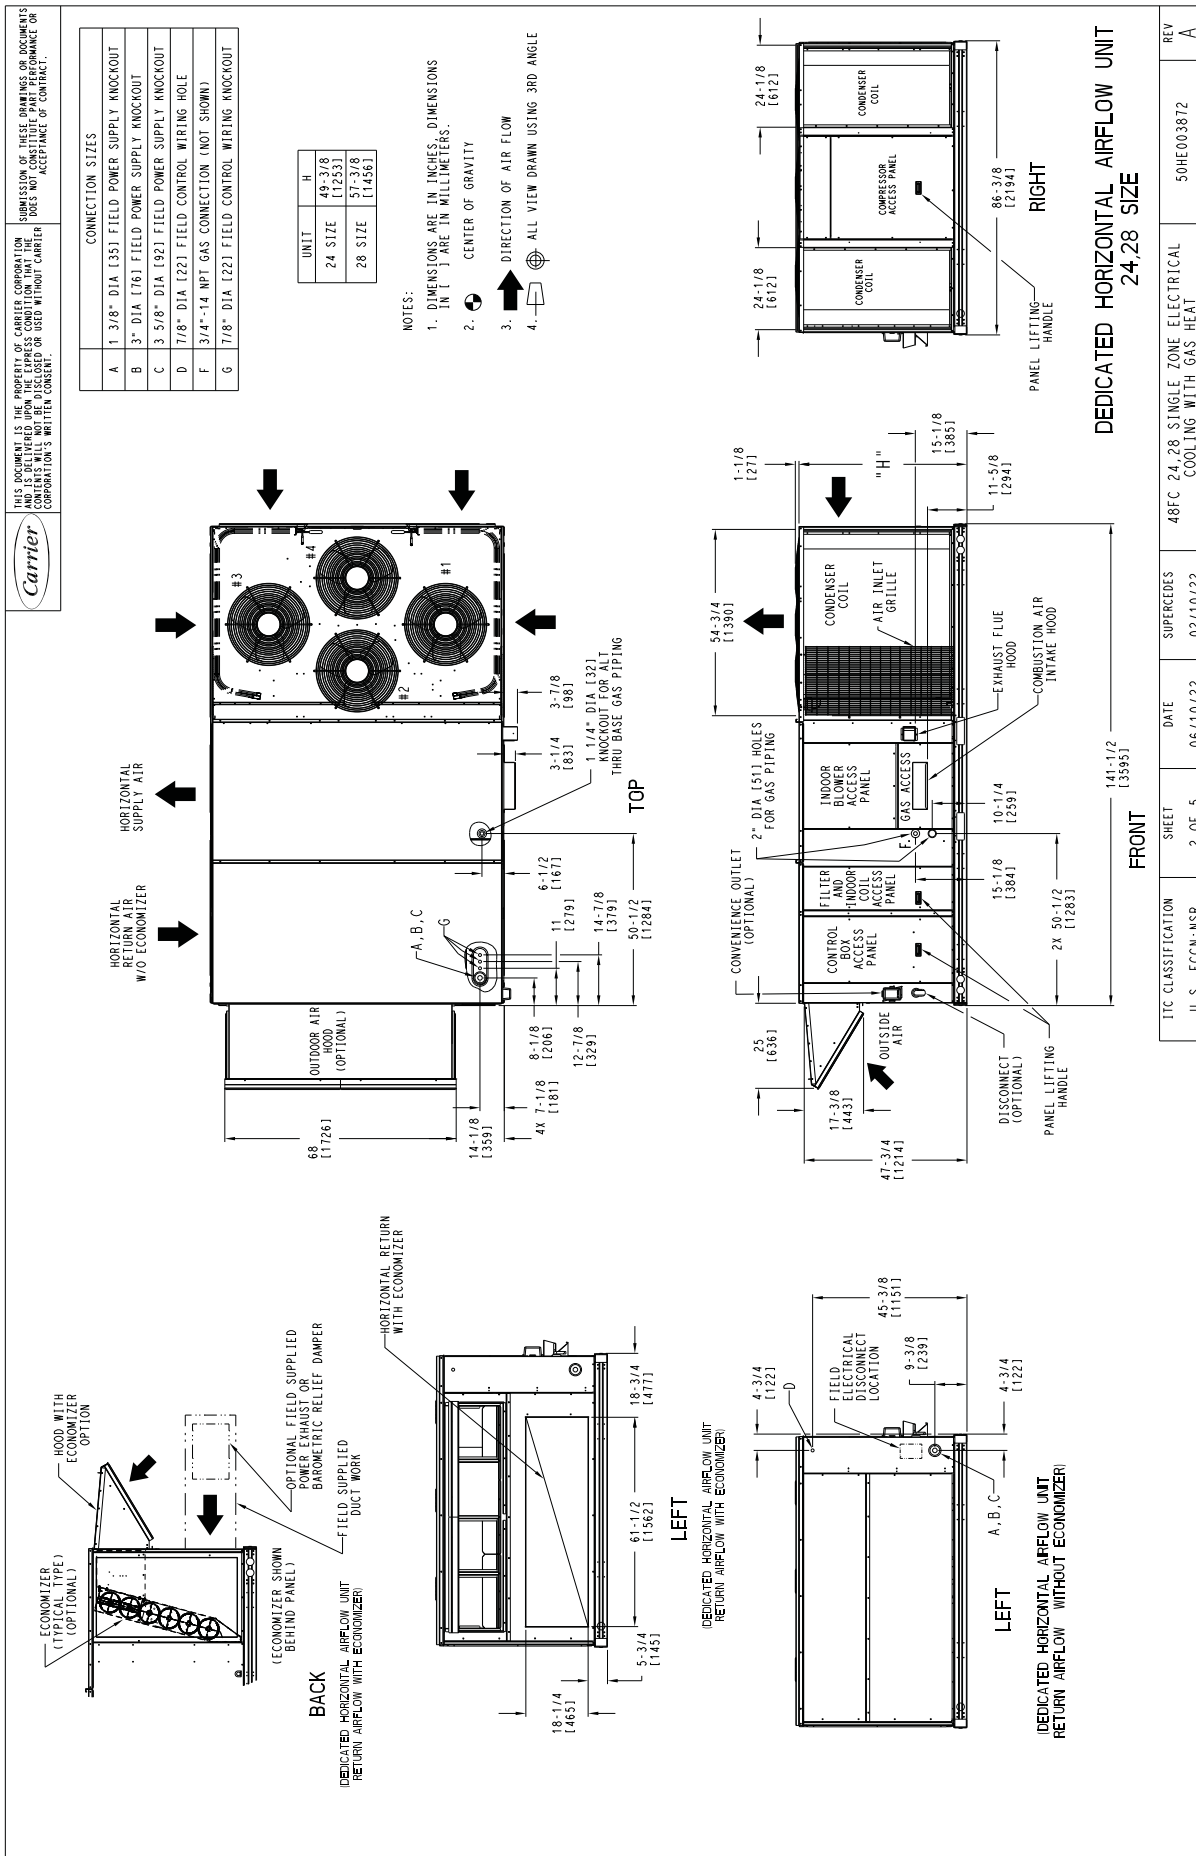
48FC24-28 Base Unit Dimensions (cont)
